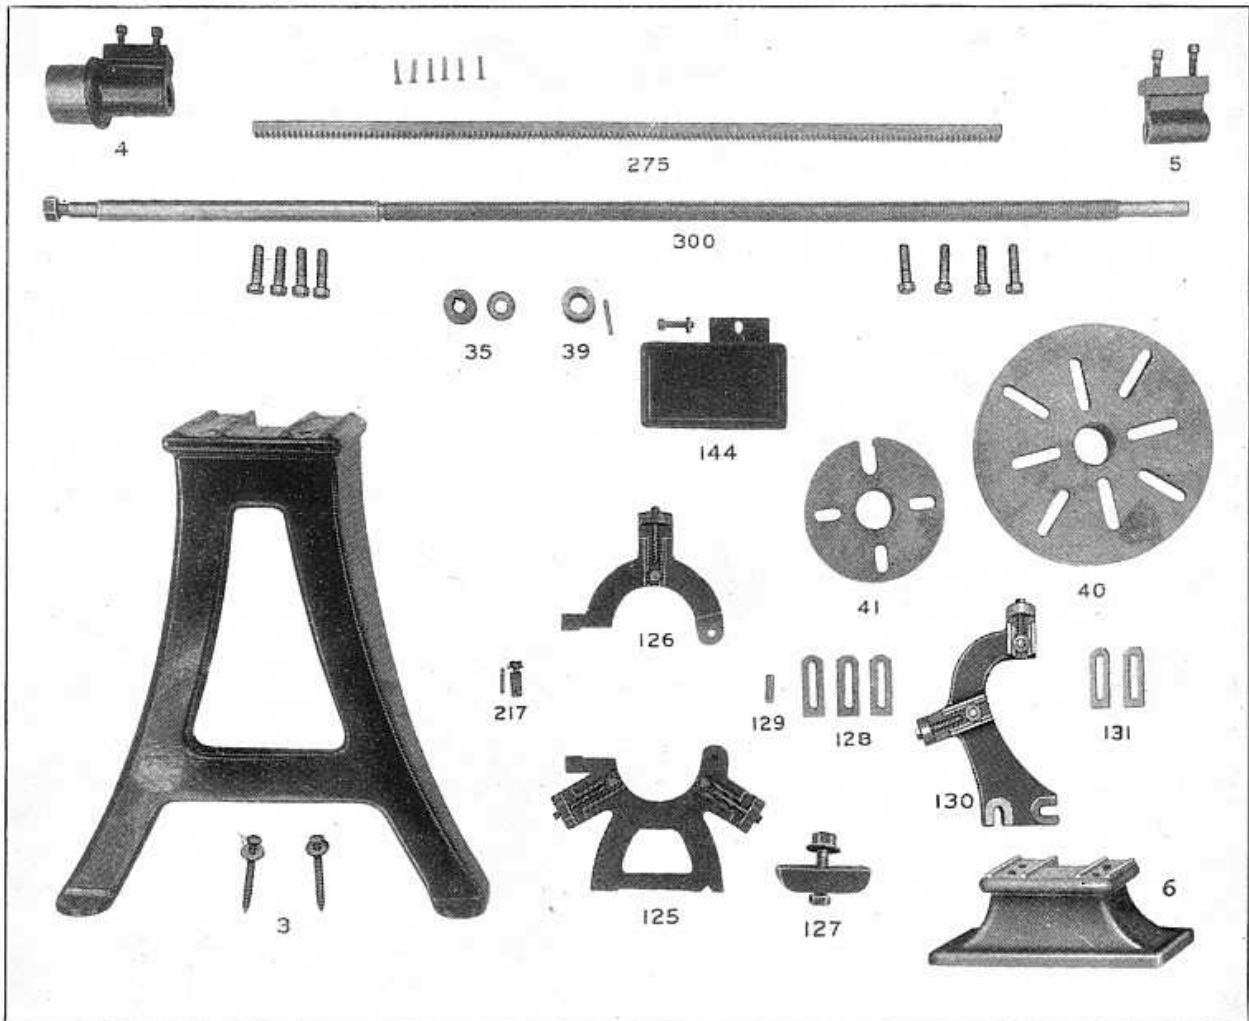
Lead Screw, Leg, Rack and Lathe Equipment Parts for South Bend Lathes.
